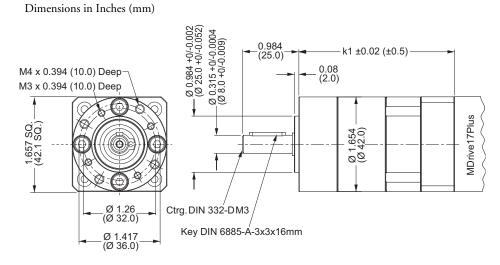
Planetary Gearbox Specifications for MDrive17Plus
